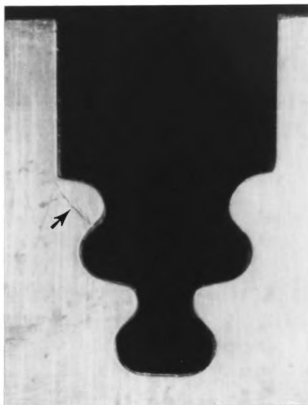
Loading grip #4 containing a crack initiating from a load bearing surface. 5.5X
